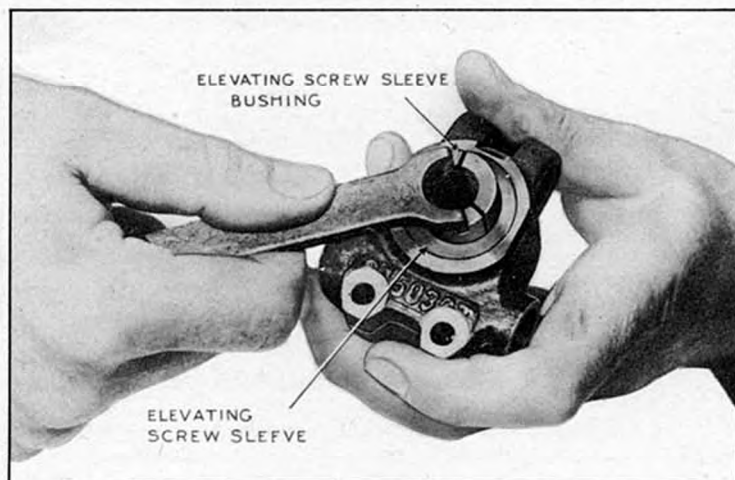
Screwing elevating screw sleeve bushing into the elevating screw sleeve with the elevating mechanism wrench.
